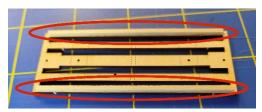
Pictured are the 3D printed parts. They were shipped in their carriers to help prevent breakage. Carefully cut out each piece.
